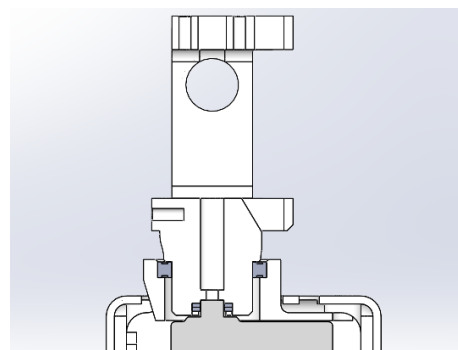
Cross-section of the area between the third and fourth joints, showing how the bearing system holds the vertical joints in place.
